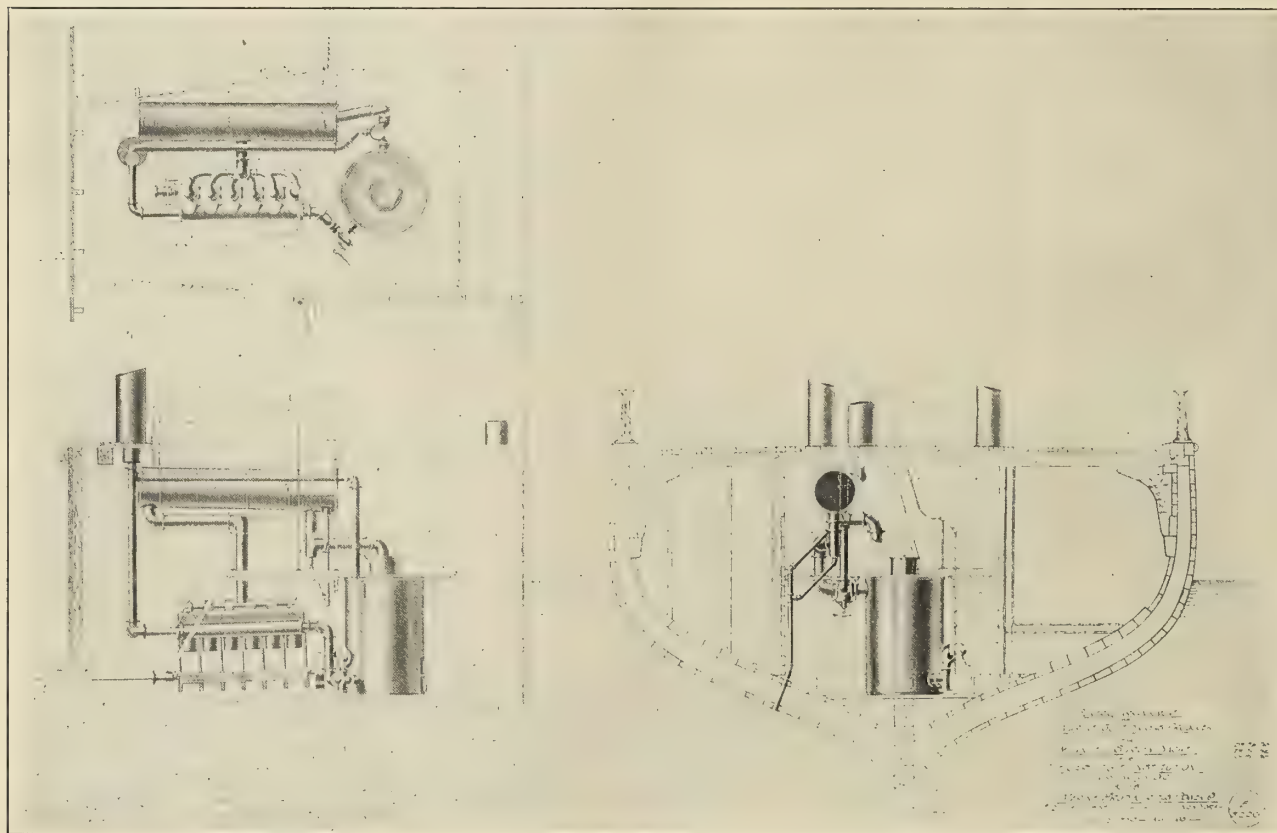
SECTIONS THROUGH THE MACHINERY SPACE, SHOWING THE ARRANGEMENT OF THE GAS PRODUCER AND ENGINE.
